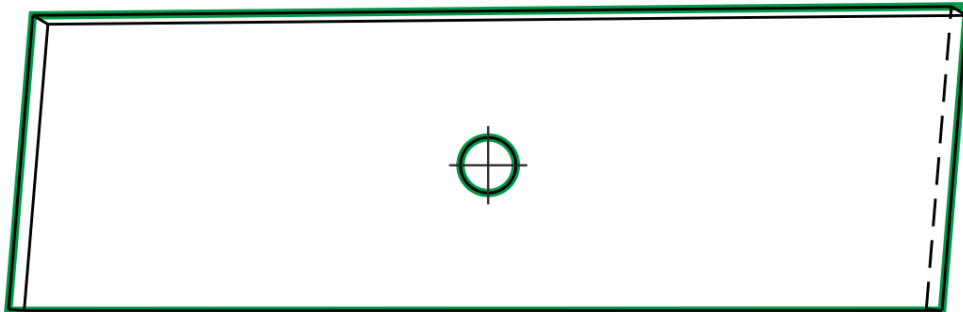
a spar part example with outer shape curve for laser cutting definition
